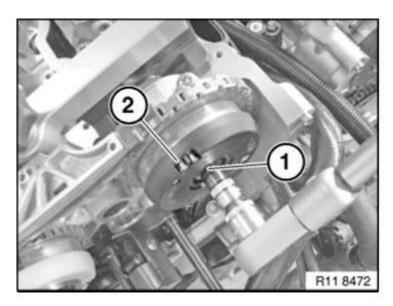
Identifying Special Tool 11 9 891 And Special Tool 11 9 893
